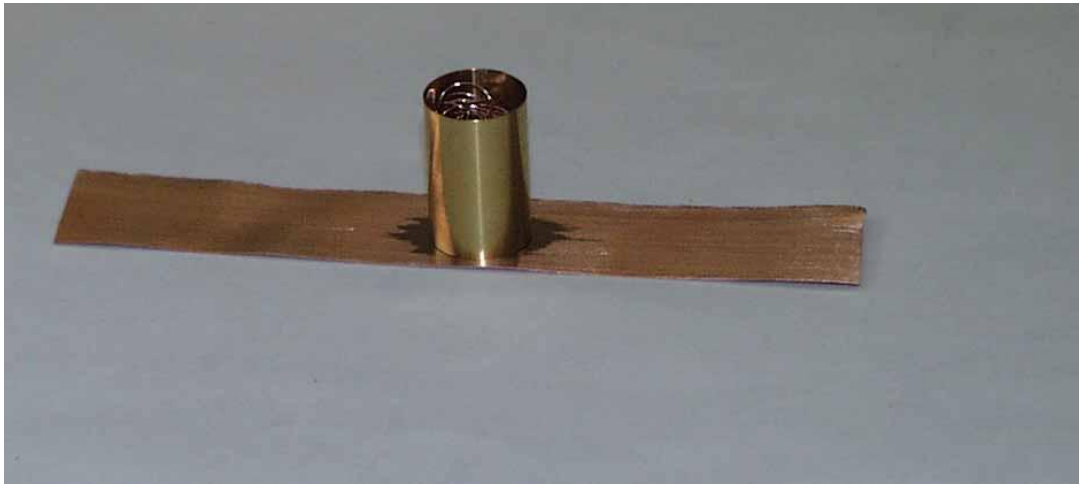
Salt pill housing including copper wires brazed to the copper bus and a brass cylinder soldered to the bus.
